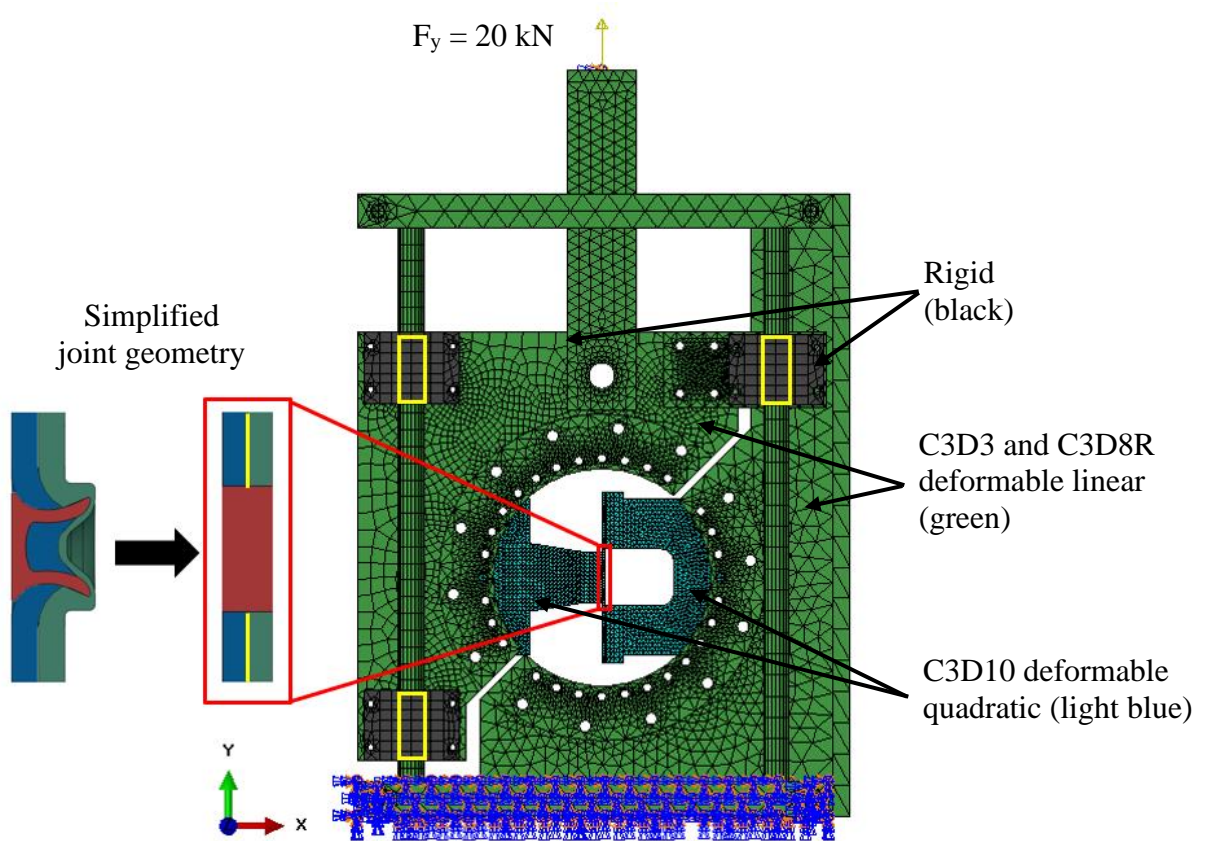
Cross-tension sheet metal joint test fixture Finite Element model with SPR geometry simplification with aluminum top sheet (blue), aluminum bottom sheet (green), SPR steel joint (red) in left images and yellow lines indicating general contact interfaces
